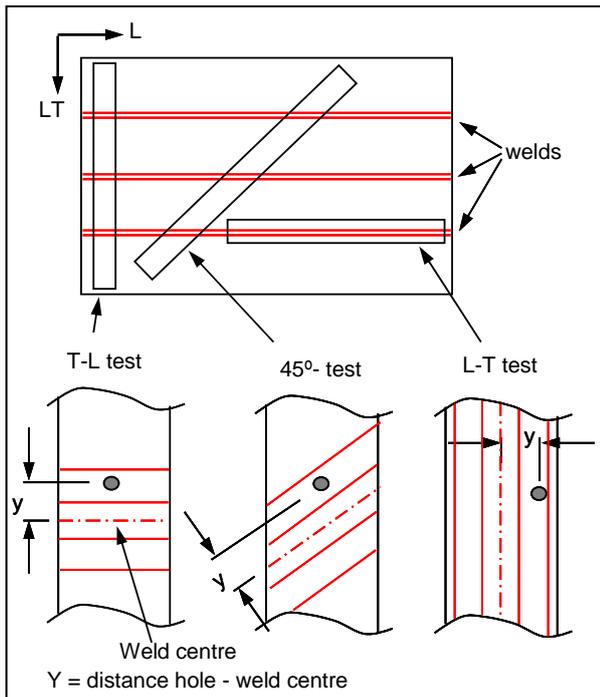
Orientation of FS welds in the fatigue test specimens
